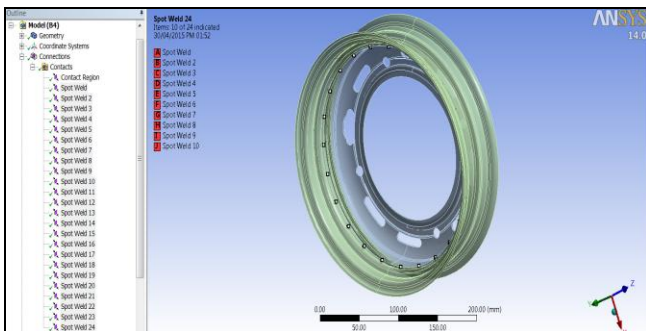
Wheel rim in which disc and circular profile welded by 24 spot welds
